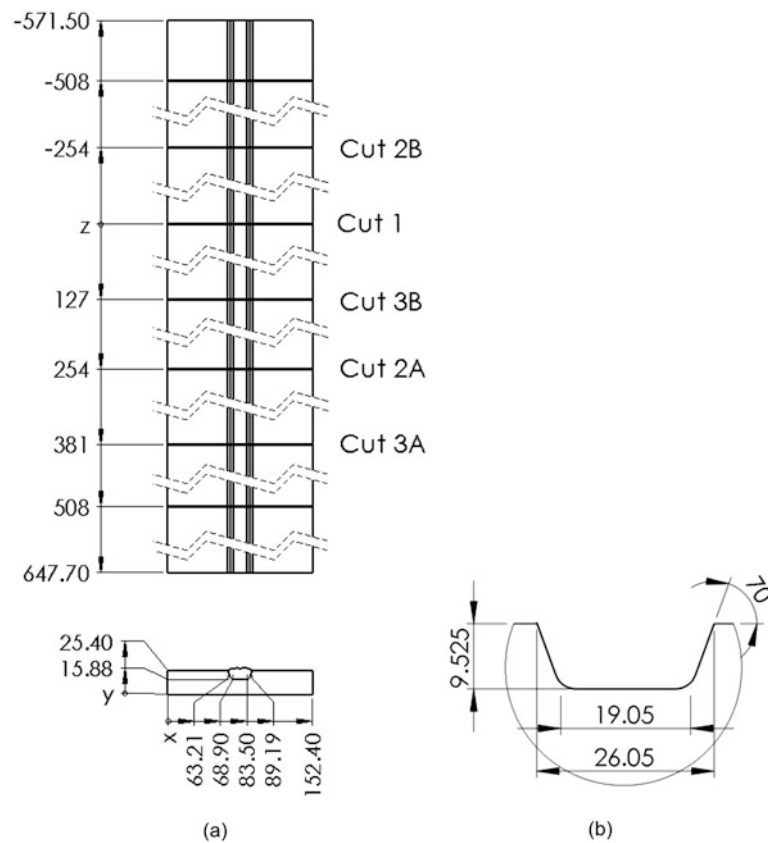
Stainless steel dissimilar metal (a) dimensions and measurement locations and (b) slot details (dimensions in mm)
